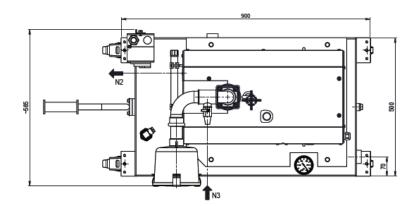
Dimensions vacuum system VO 0080 B AAA I3XX(mobile)
